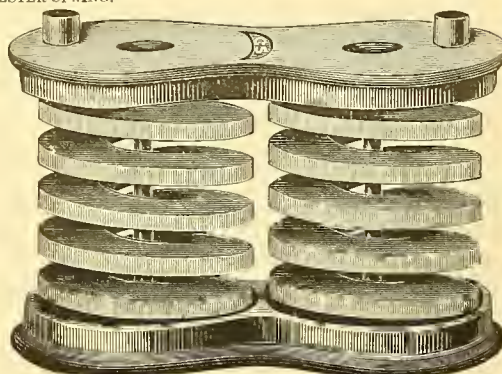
EDGE-ROLLED BOLSTER-SPRING.
